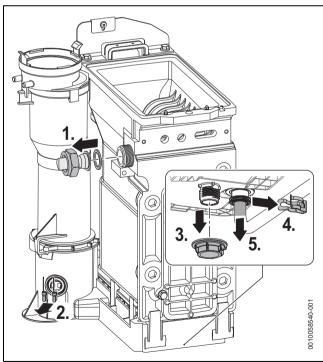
Separating components from the heat exchanger assembly Removing the heat exchanger assembly Refer to figure 102.
